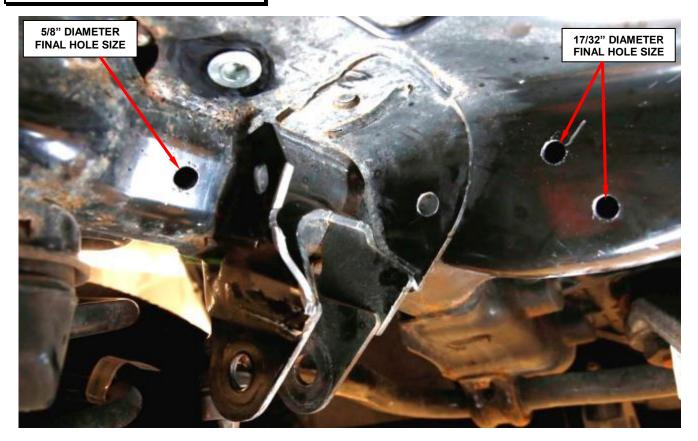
Drill Three Holes in Frame at Center Punch Marks
